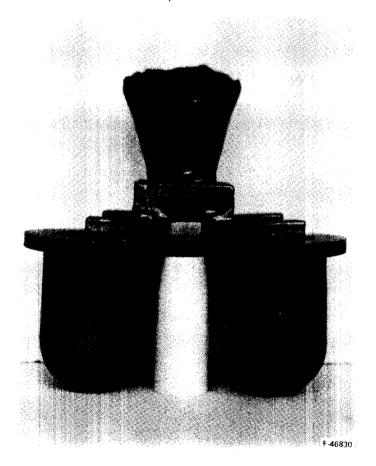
Sandblasted Housing Castings with Risers and Gating Attached. Casting Poured into an Investment Shell Mold.
